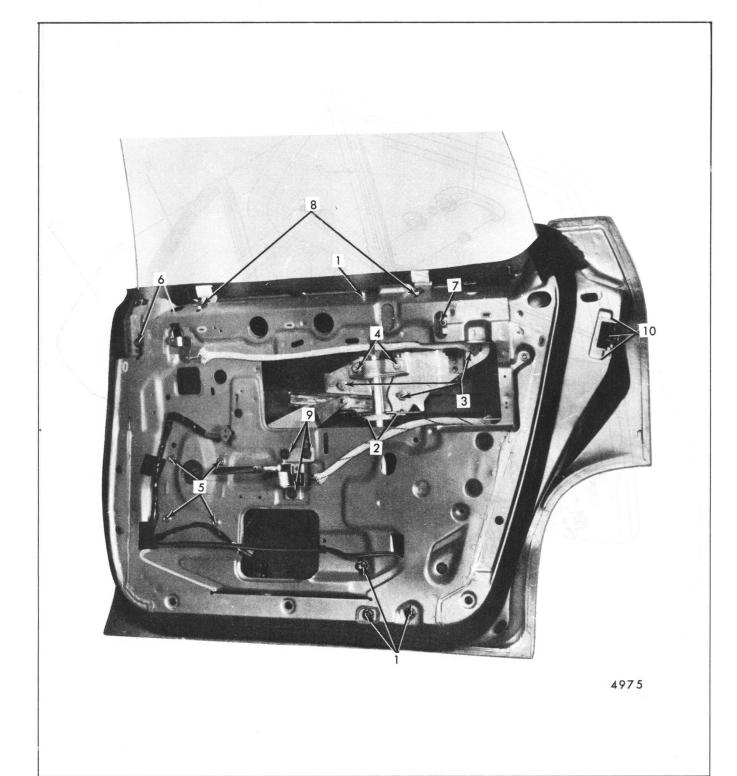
Rear Door Hardware Attachments - "6CB69" Style
